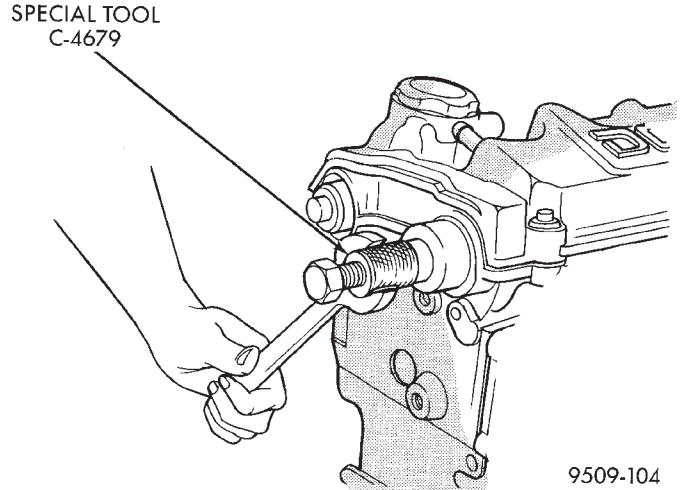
Camshaft Oil Seal—Removal With C-4679-A INSTALLATION
